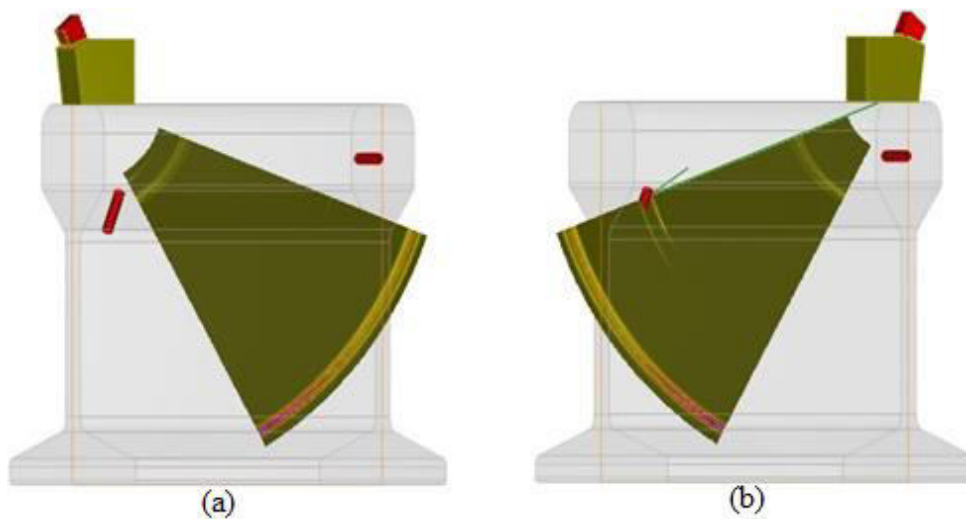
3D image view of the test sample while inspecting (a) defect-1 using PA2 (Wedge-3)
